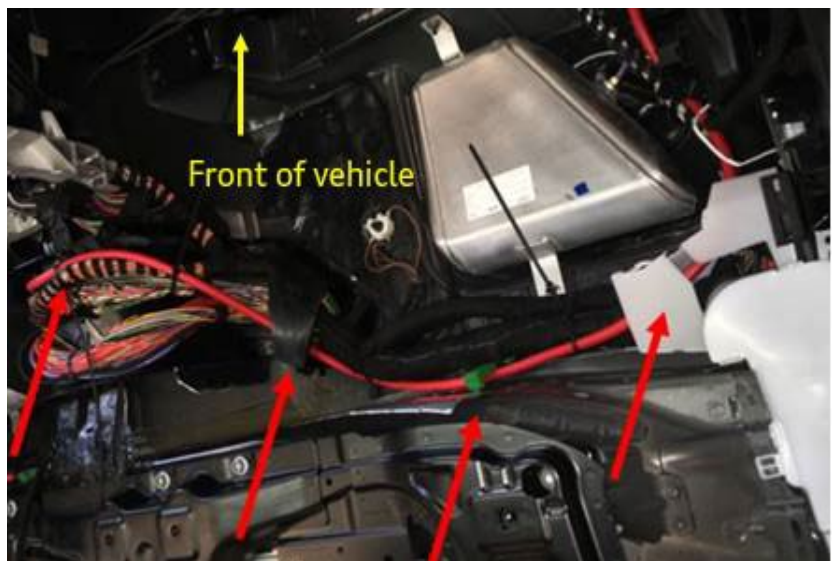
Routing path passenger side. The lower portion of the photo is where the sea bottom mounts.
